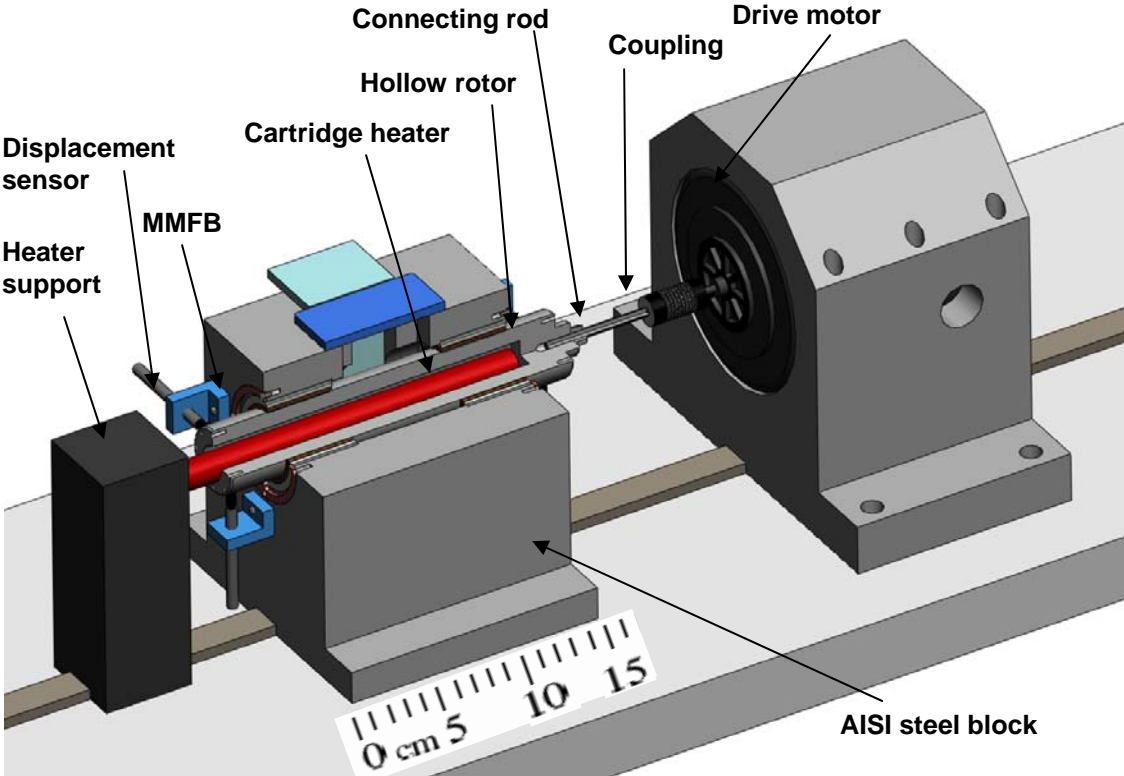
Sectioned view of test rotor and bearings inside their housing.
